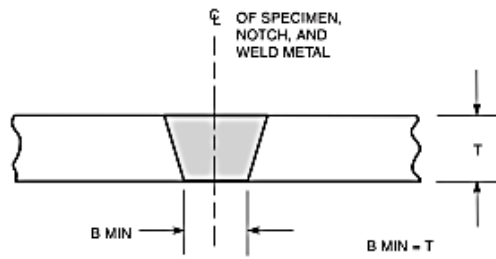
7—Recommended Ratio of Weld Metal to Specimen Thickness for Weld-Metal Fracture Toughness Specimen (Compact Tension Specimen)
